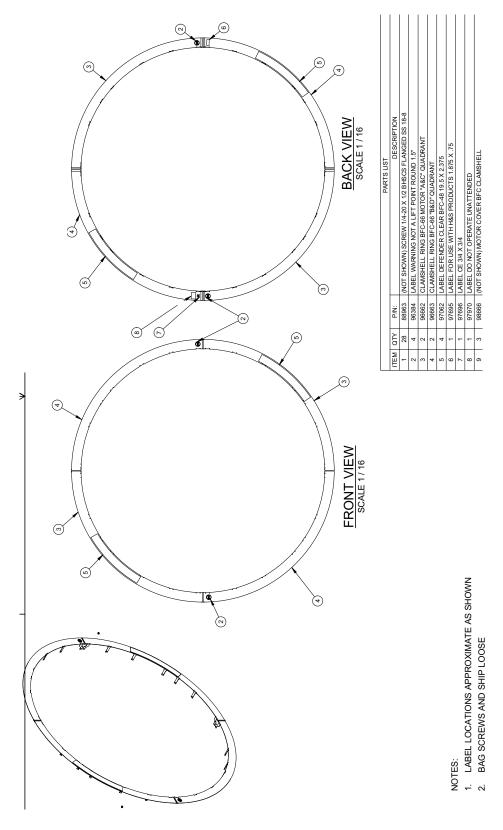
BCF-66 DEFENDER GUARD KIT ASSEMBLY (P/N 97222)
